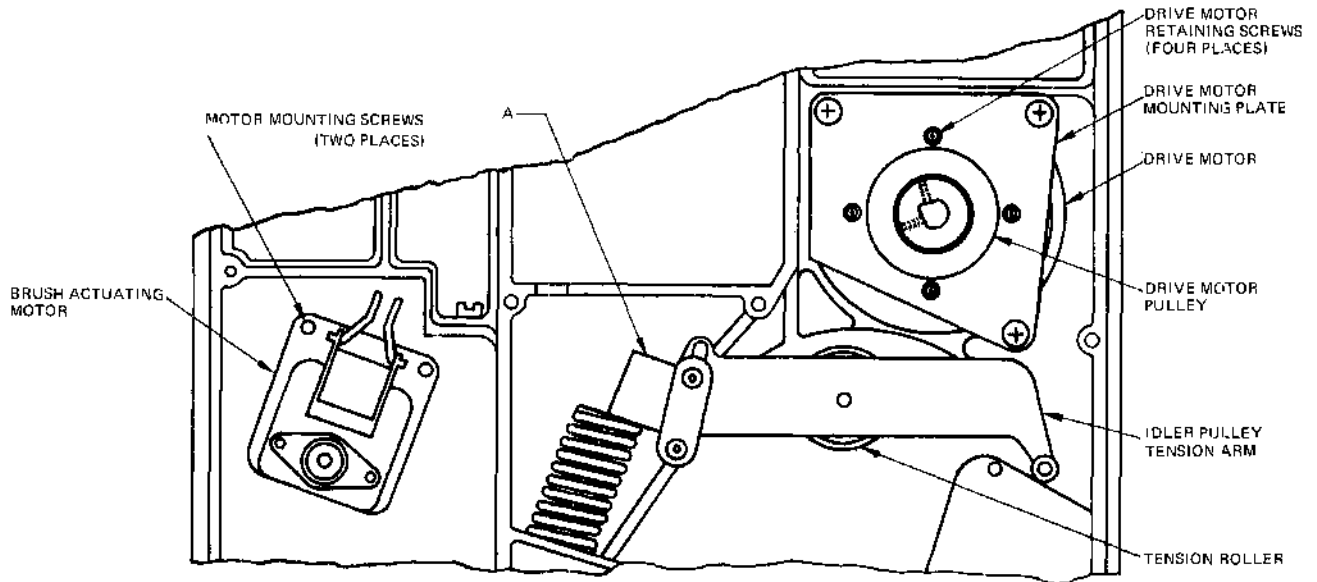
Brush Actuating Motor and Drive Motor Placement
